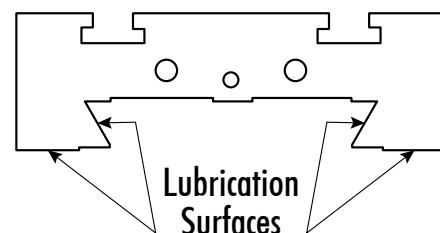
Lubrication surfaces for the mill table or crossslide.
